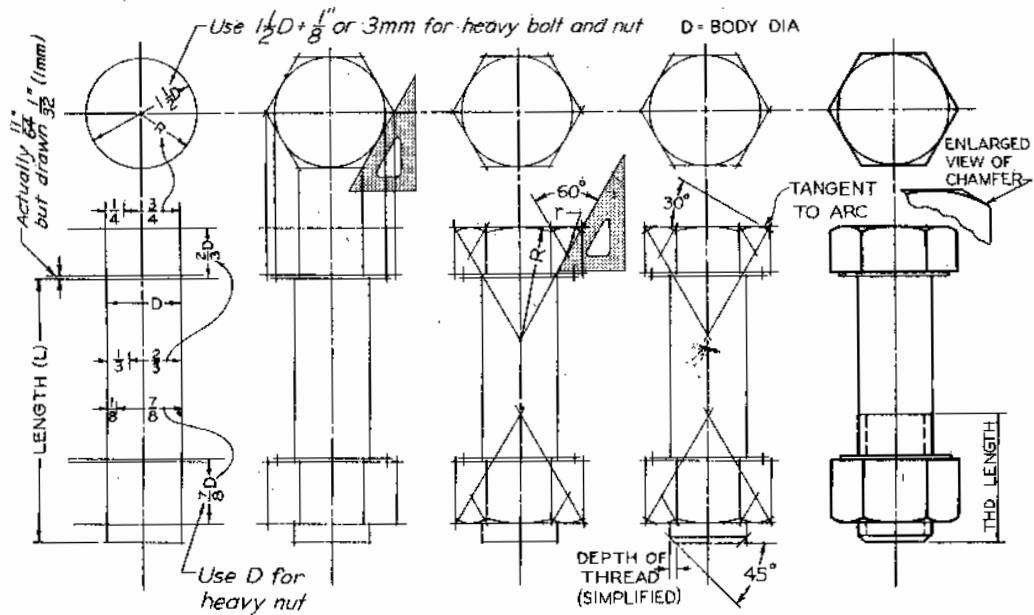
Steps in drawing a hexagon-head bolt and hexagon nut
